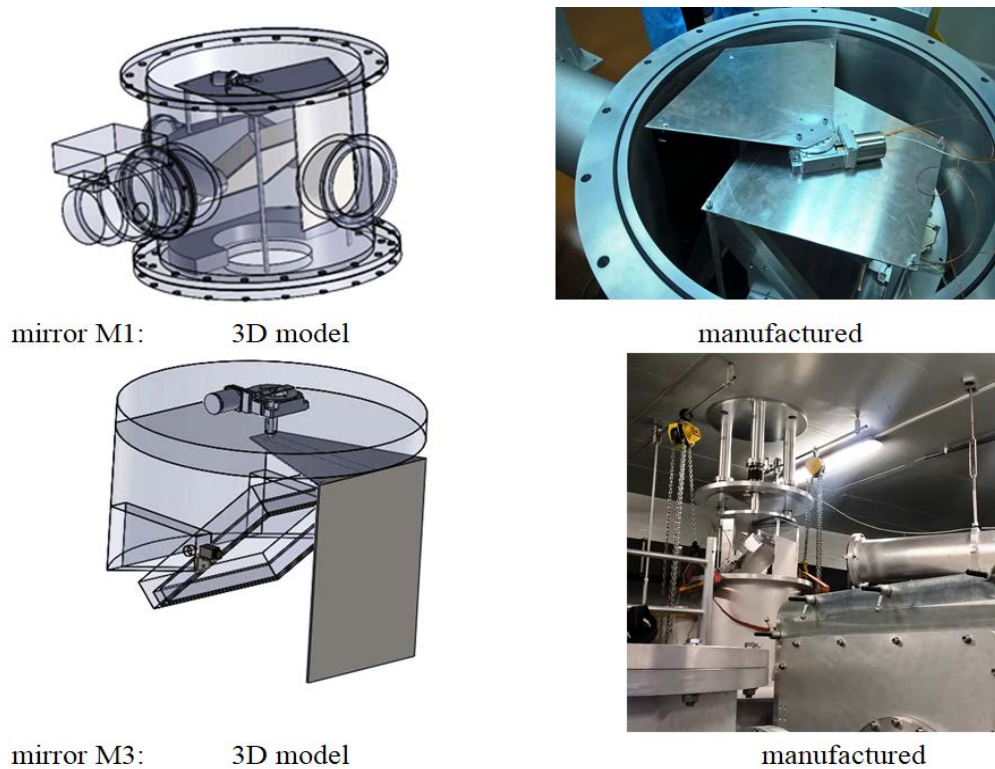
Subassemblies for mounting mirrors M1 and M3
